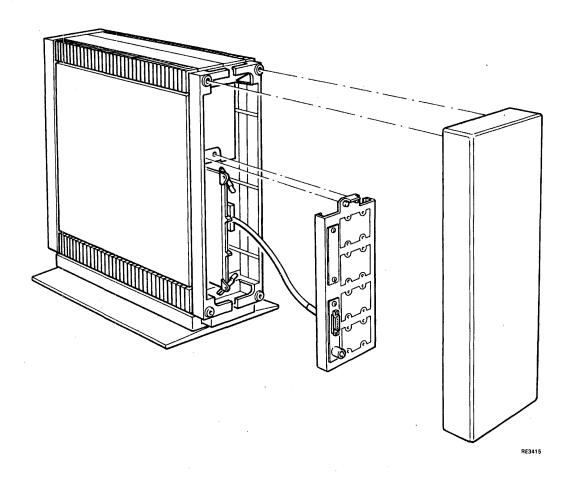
Rear Panel, Bulkhead, Blanking Panel, and Modules
